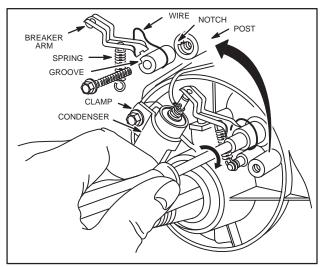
INSTALLING STYLE II BREAKER POINTS
